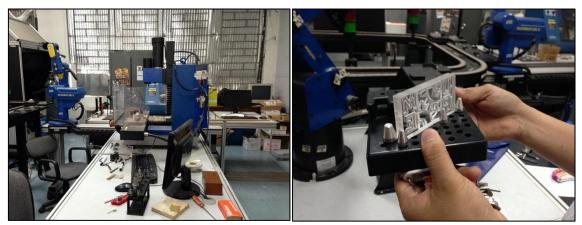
Scorbot-ER9 equipment used for laser cutting and sample end-product
